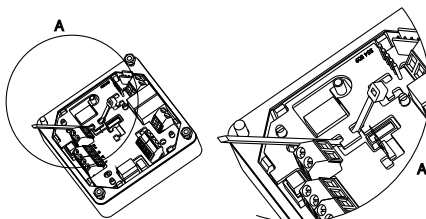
Using the cable clips on versions without EN 175301-803 plug
